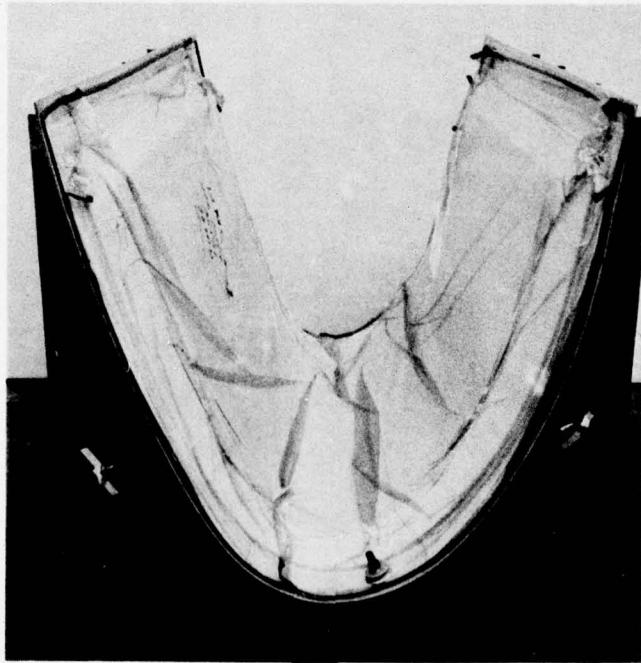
Details for Repair of a Void in the Leading Edge Assembly
